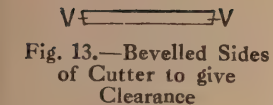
Bevelled Sides of Cutter to give Clearance
